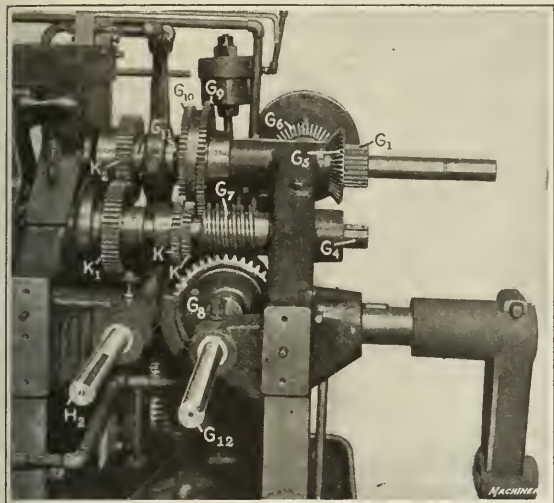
Partially Dismantled View, showing Gear Drive for Main Cam-shaft, Work-spindle and Threading Mechanism
